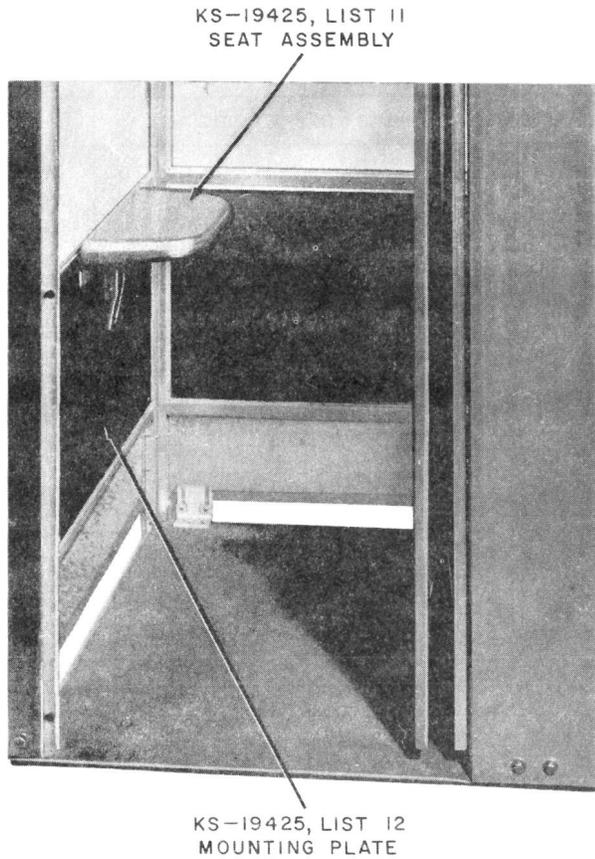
KS-19425, List 11 Seat Assembly With KS-19425, List 12 Mounting Plate
